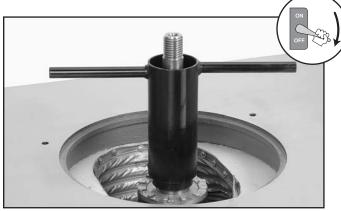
Spindle shaft nut wrench positioned over the spindle.
